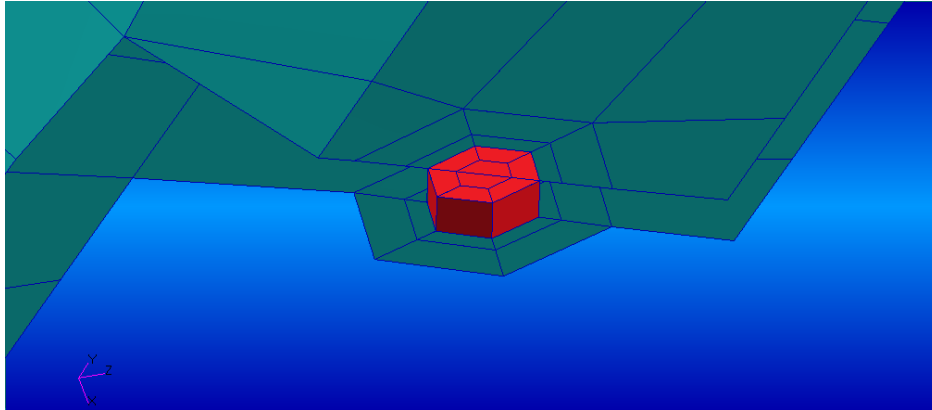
Example of a simple spot weld model. Shell elements are displayed in green and the spot weld nugget is represented as red solid bricks.
